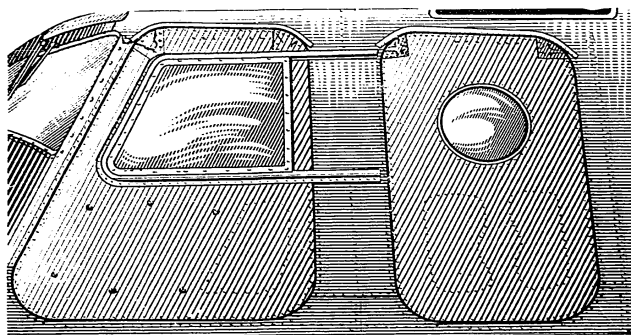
SLIDING BLISTER MOUNTED IN PILOT'S EMERGENCY EXIT DOOR (outside view).
